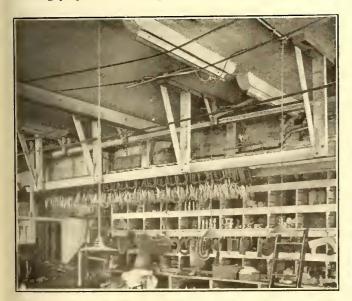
Boston Elevated Shops—Armature Coil Storage Rack in Insulating Room
